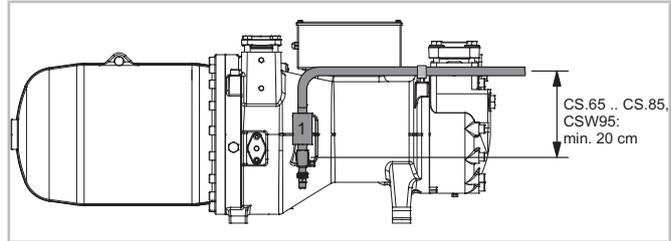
Pipe layout of the ECO suction gas line at the compressor
